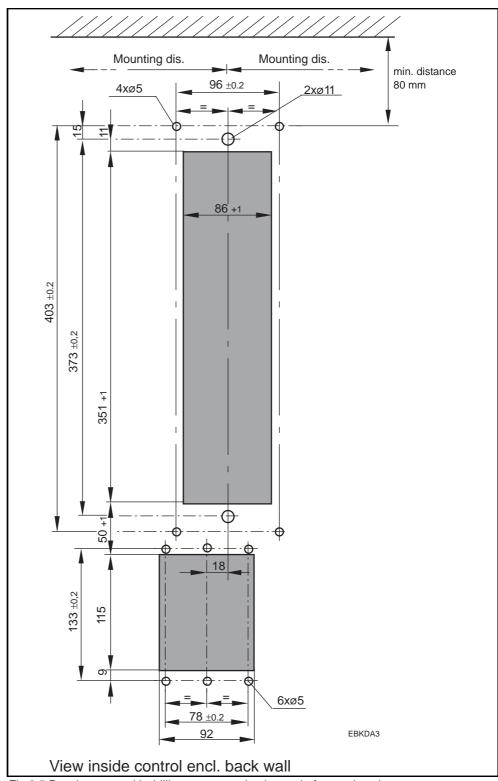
Panel cutouts with drilling pattern on back panel of control enclosure
